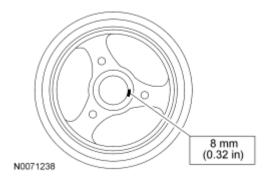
Applying Sealant To Woodruff Key Slot Courtesy of FORD MOTOR CO.
